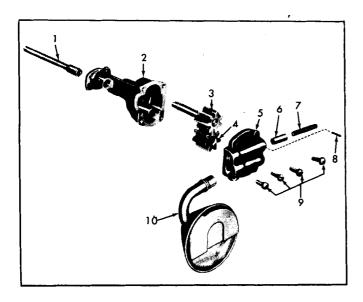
Oil Pump - Exploded View (307 Engine)
